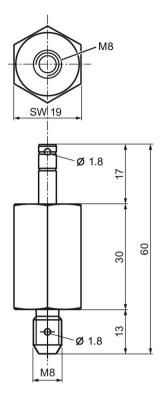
Dimension drawing of quick change holder 6GT2690-0AH00
